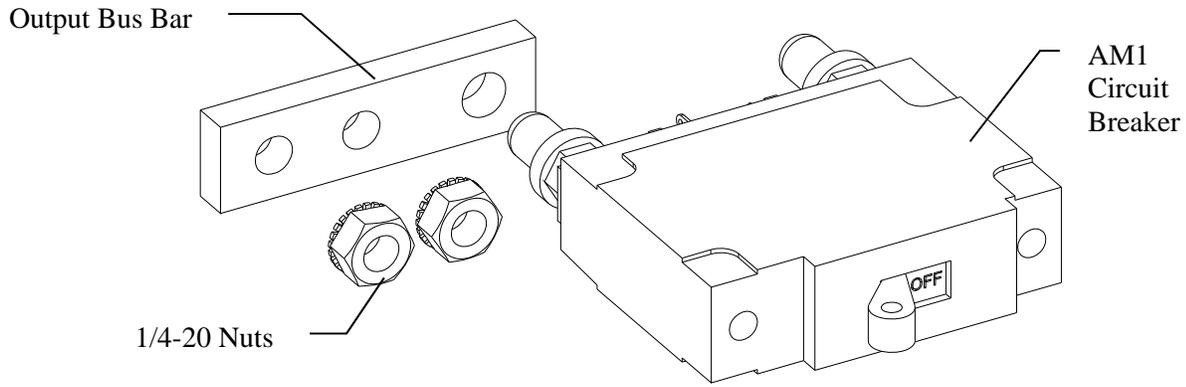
AM1 TYPE BREAKER KIT COMPONENTS
